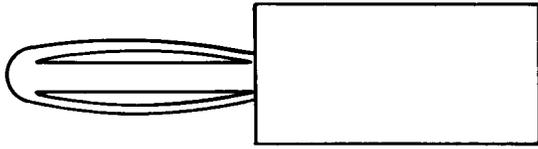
P-44B490, P-44B491, or P-44B492 Plug
